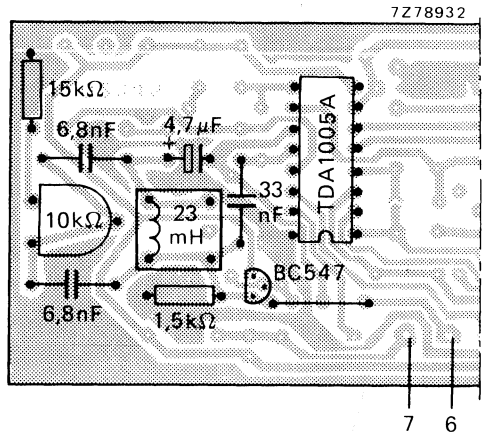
Printed-circuit board component side, showing component layout of Fig. 19.
